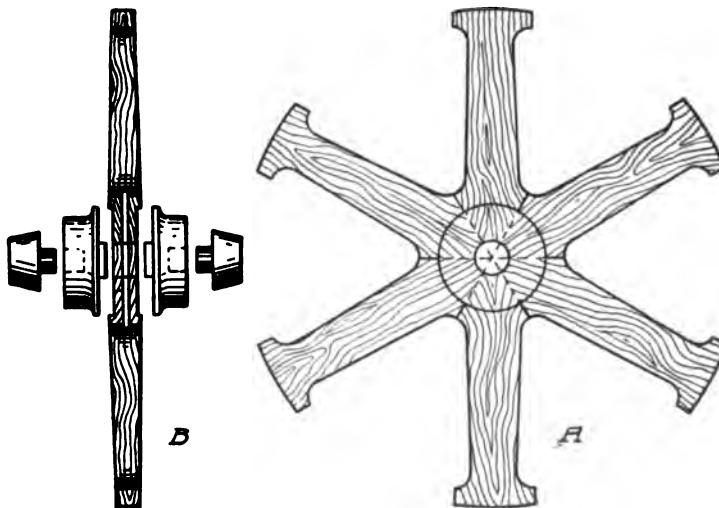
Arms, Hub, and Core Prints of Spur-Gear Pattern
